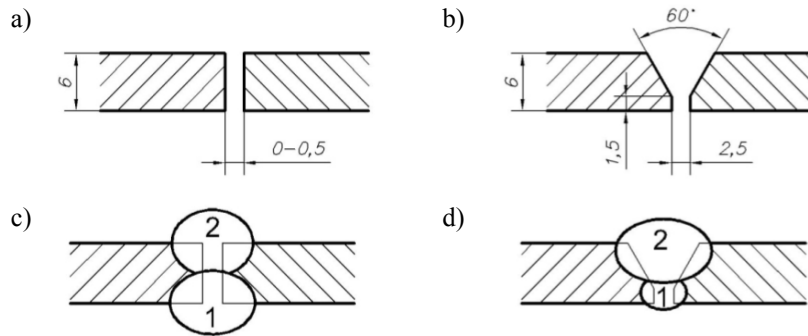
The edges before welding (a, b) and a sequence of welding (c, d) for “I” joint (a, c) and “V” joint (b, d), respectively
